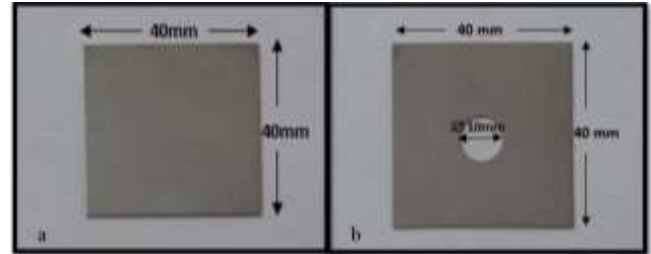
The workpiece shape (a) workpiece before machining.(b) workpiece after machining.
